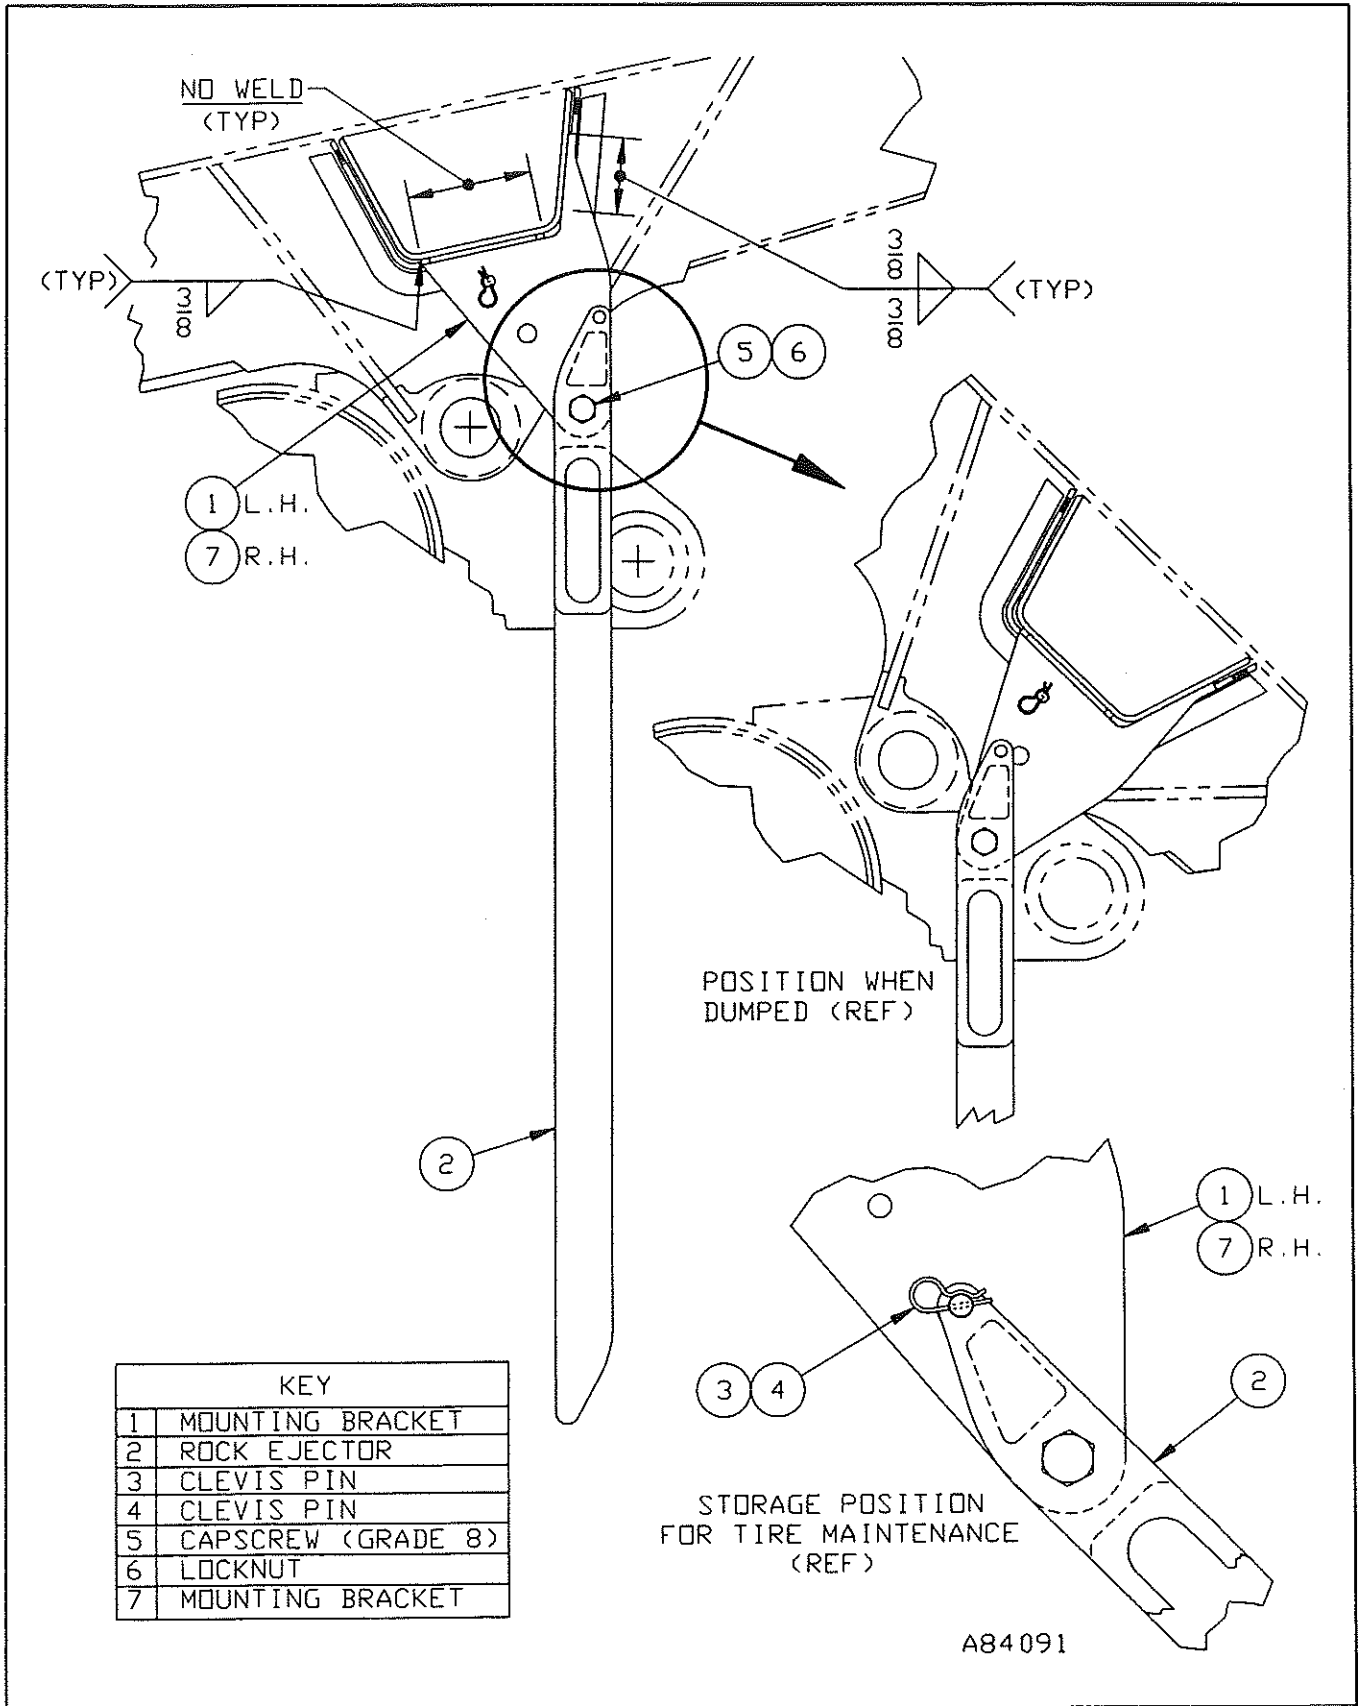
ROCK EJECTOR ASSEMBLY
